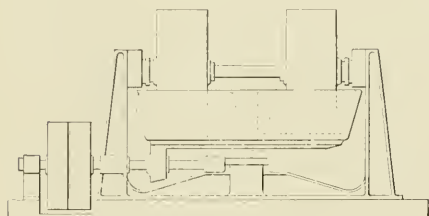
ROLLER TYPE GRINDER FOR GRINDING AND MIXING THE MOLDING SAND
